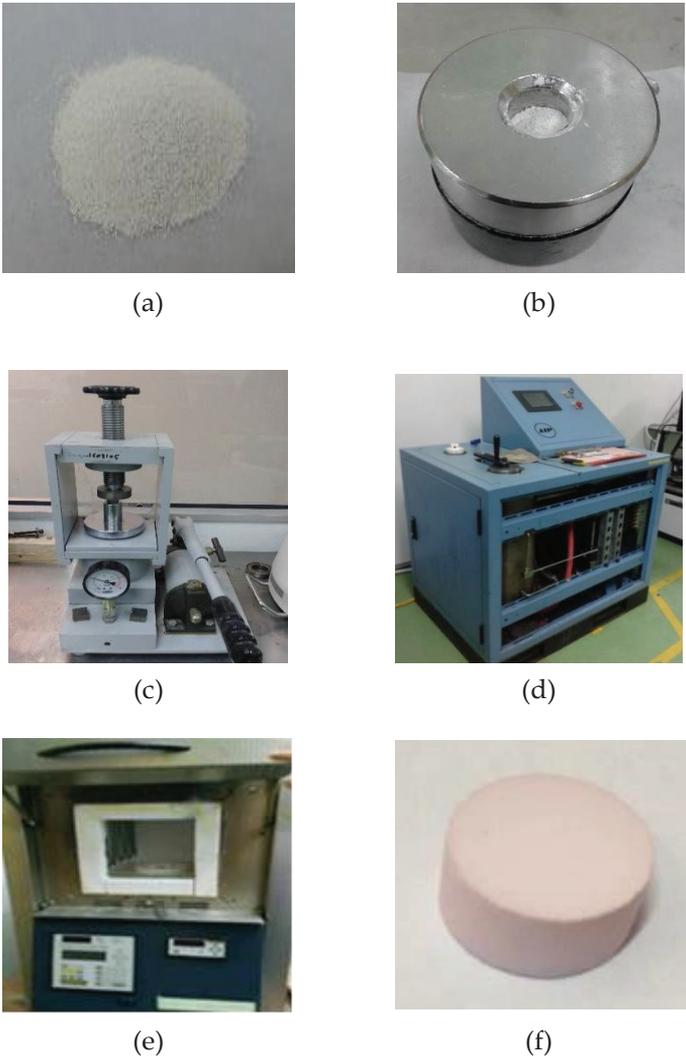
Procedure to fabricate alumina-zirconia cutting tool started with (a) blending alumina and zirconia powders, (b) inserting the powders into the mould, (c) pressing the mould by hydraulic, (d) pressing the mould by using cold isostatic press, (e) sintering the compacted powders to obtain ceramic cutting tool and (f) solid sintered of ceramic cutting tool
